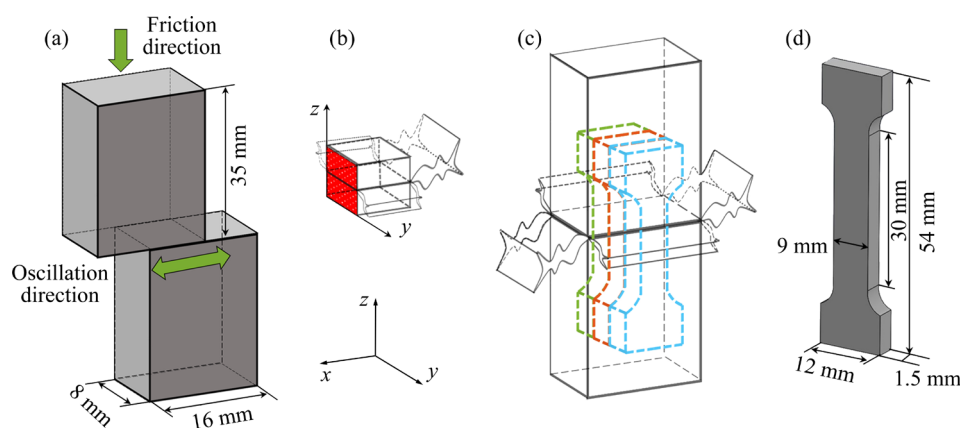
Schematic diagram of welding process and specimen dimensions (a), sampling position of metallographic specimens (b), sampling position of tensile specimens (c), and dimensions of tensile specimens (d)
